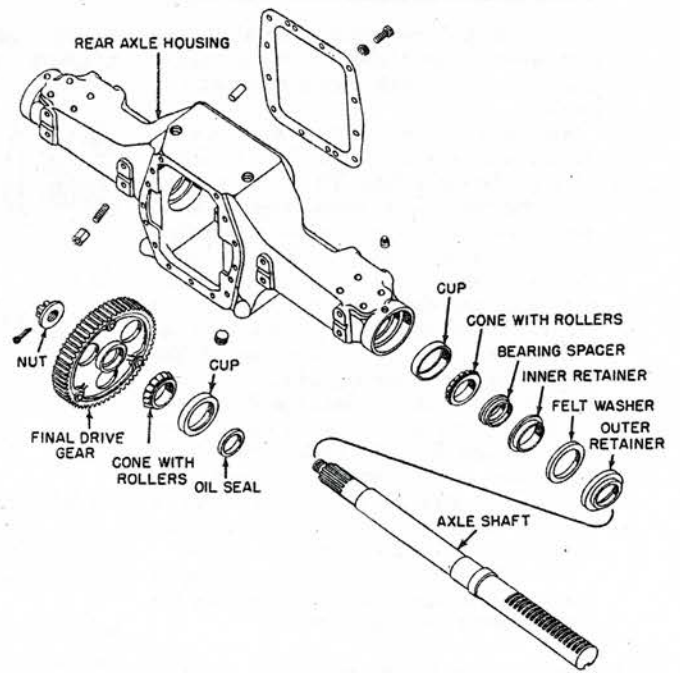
H Exploded view of Model 60 final drive. Model 50 is similar
